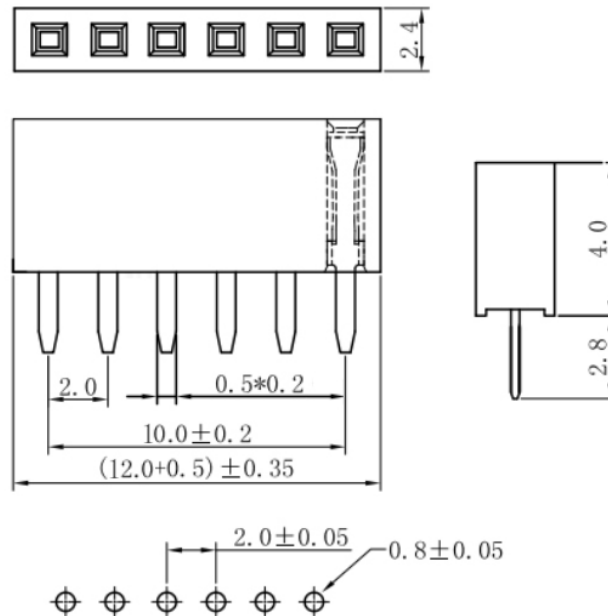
Mechanical Dimensions of DIP Socket ATDSC2MM6P
